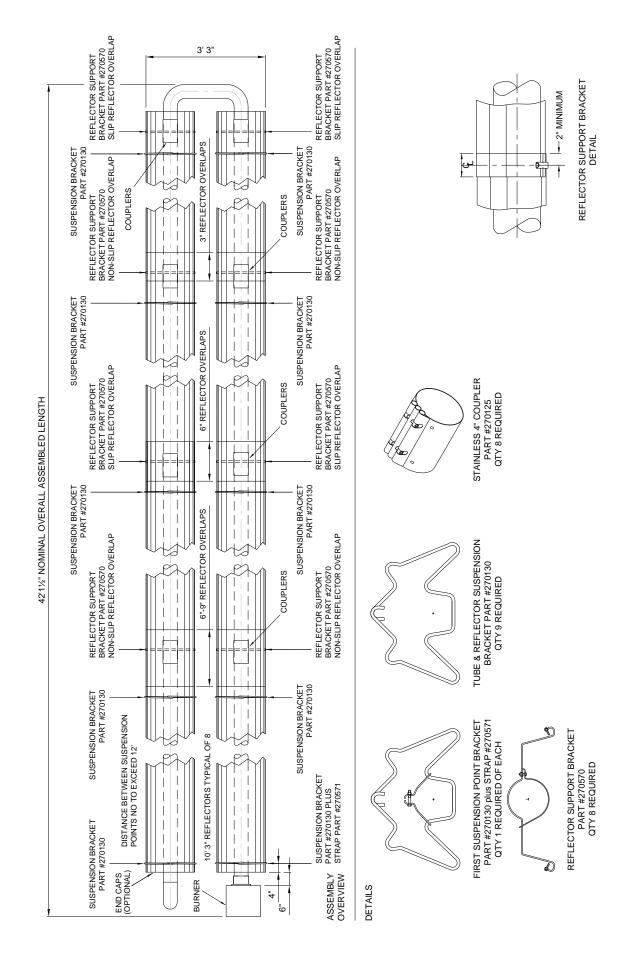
Heater Assembly: Model U tube VCS 170-U80 and 200-U80
